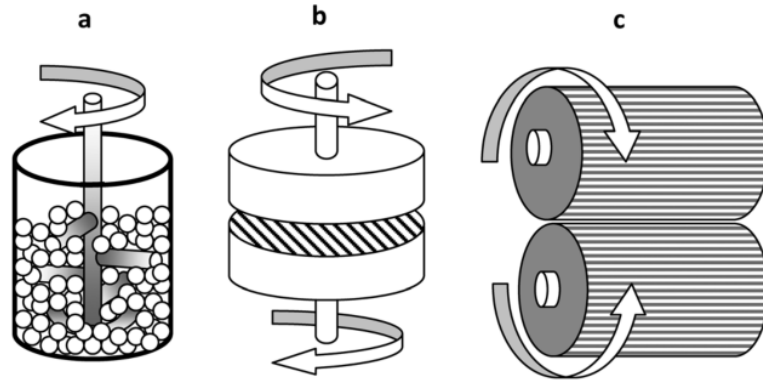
Schematic representation of the direct milling equipment: (a) attritor mill, (b) pan mill, and (c) roll mill (the figure is reprinted from [17]).
